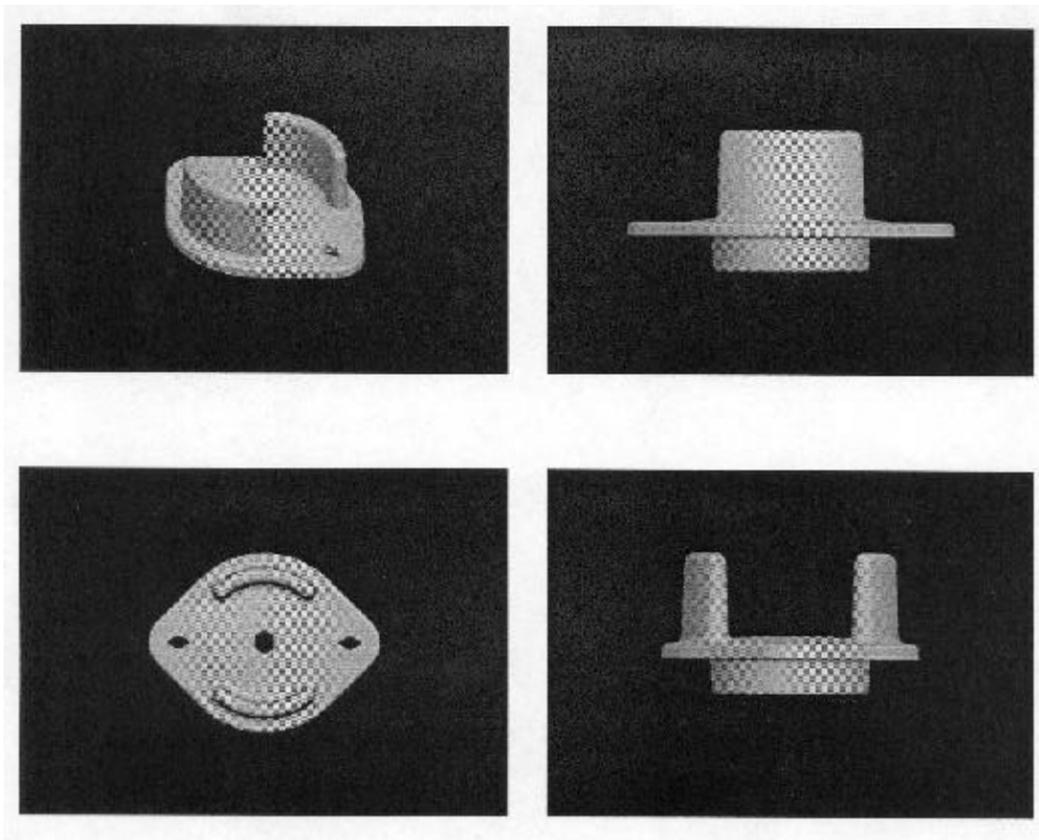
Modified hand hole cover / Couvercle de trou de main modifié
